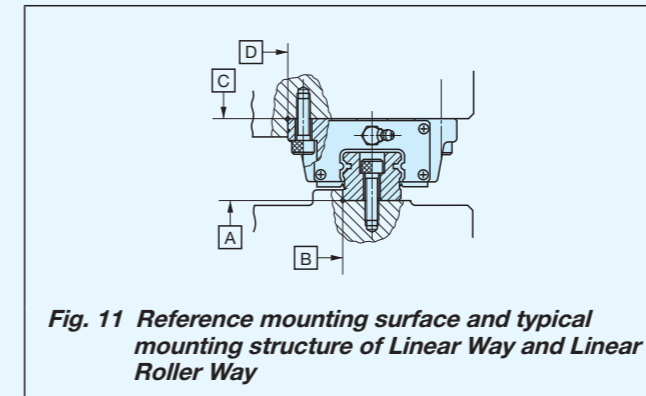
Reference mounting surface and typical mounting structure of Linear Way and Linear Roller Way
